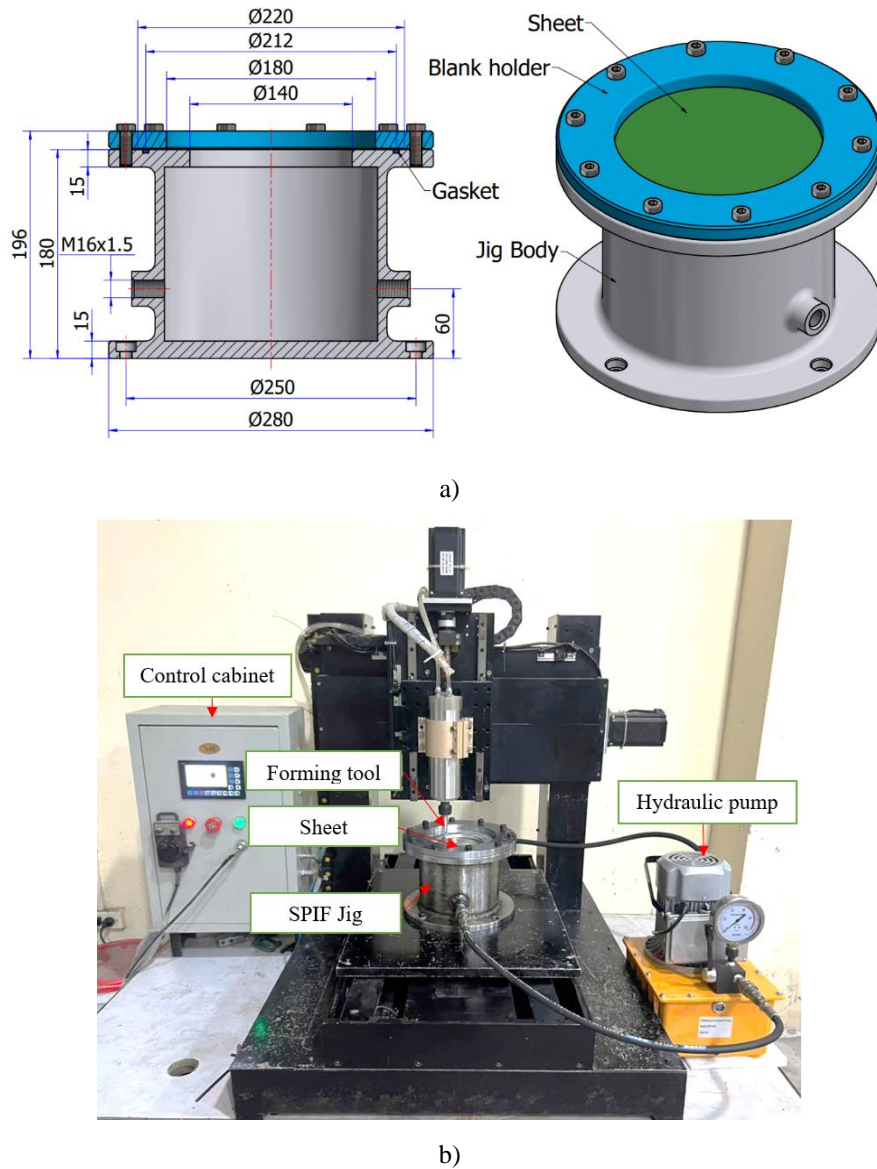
a) Geometry and structural layout of the custom-designed HA-SPIF fixture, illustrating the sealed hydraulic chamber and clamping system; b) experimental HA-SPIF setup, showing the three-axis CNC milling machine integrated with the hydraulic support fixture used in the forming trials
